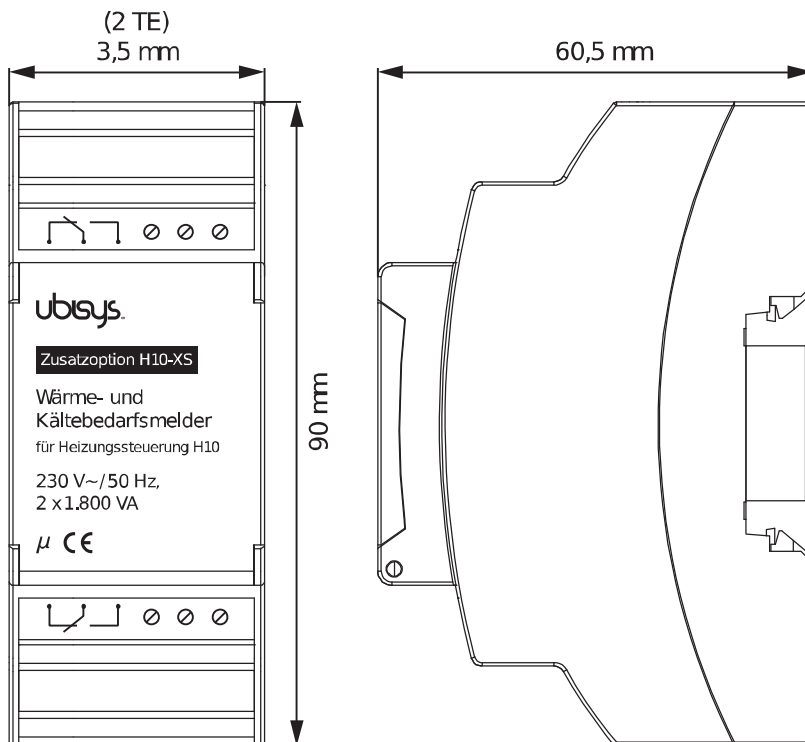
H10-XS Heating/Cooling Demand Extension Module – Dimensions
